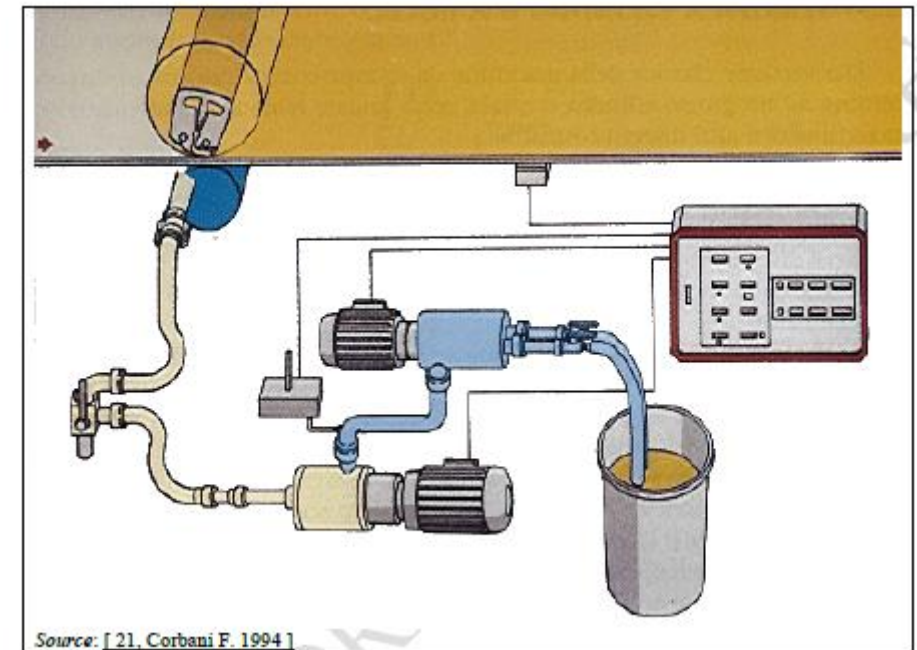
Printing paste feeding system for a rotary-screen printing machine
